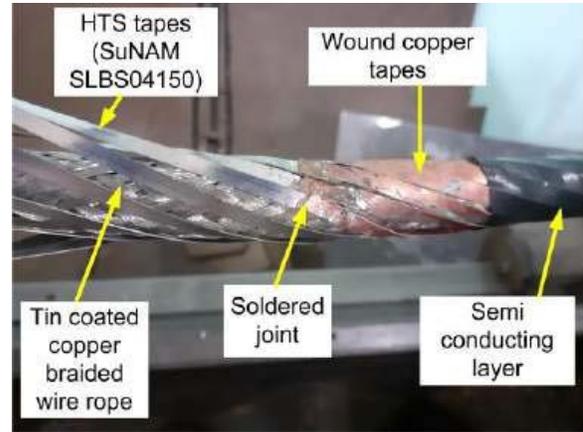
Photograph of the soldered joint to join HTS and copper tapes.
